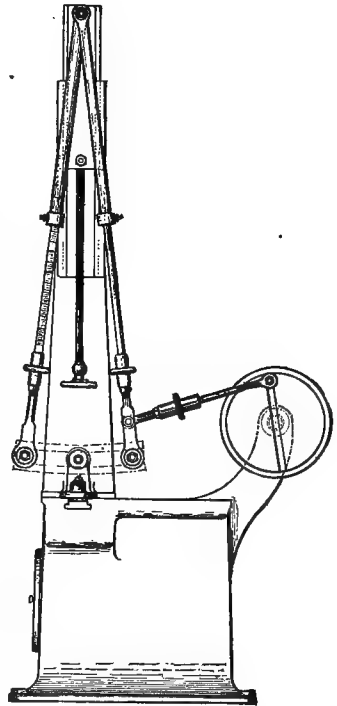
Machine for grinding the slots of locomotive links; Fétu-Defize & Co.
